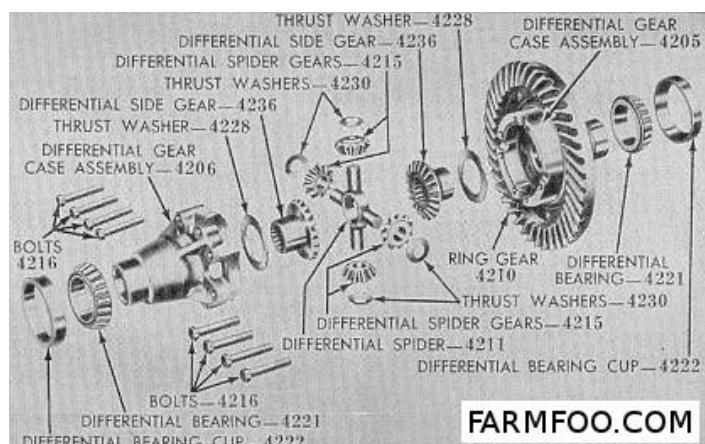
Exploded view of differential as used in models 2N-8N-9N. Bearing cups (4222) are mounted in axle housings.
